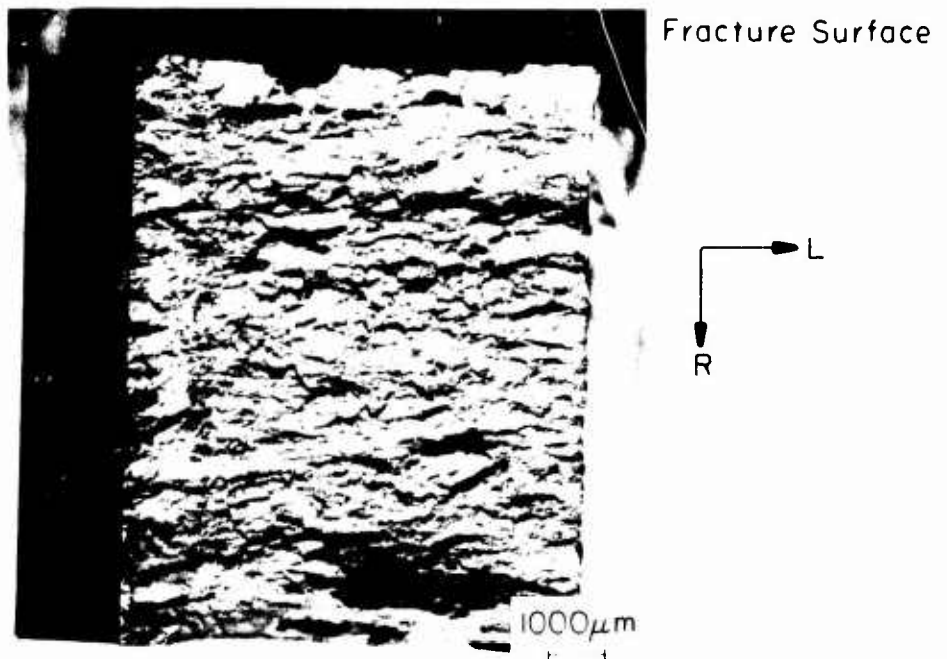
Alloy 334(10Mo-6Cr-2.5Al). Six inch billet full piece, center sample 4SLC4. (Table LXXII). Solution annealed 1350F-4 hr WQ plus 1225F-2 hr WQ, aged 1000F-96 hr. Fracture surface X8, crack path X500.
